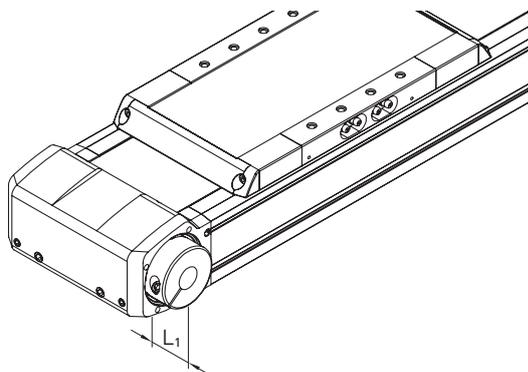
Adjusting the clamping hub distance in the direction of the motor
